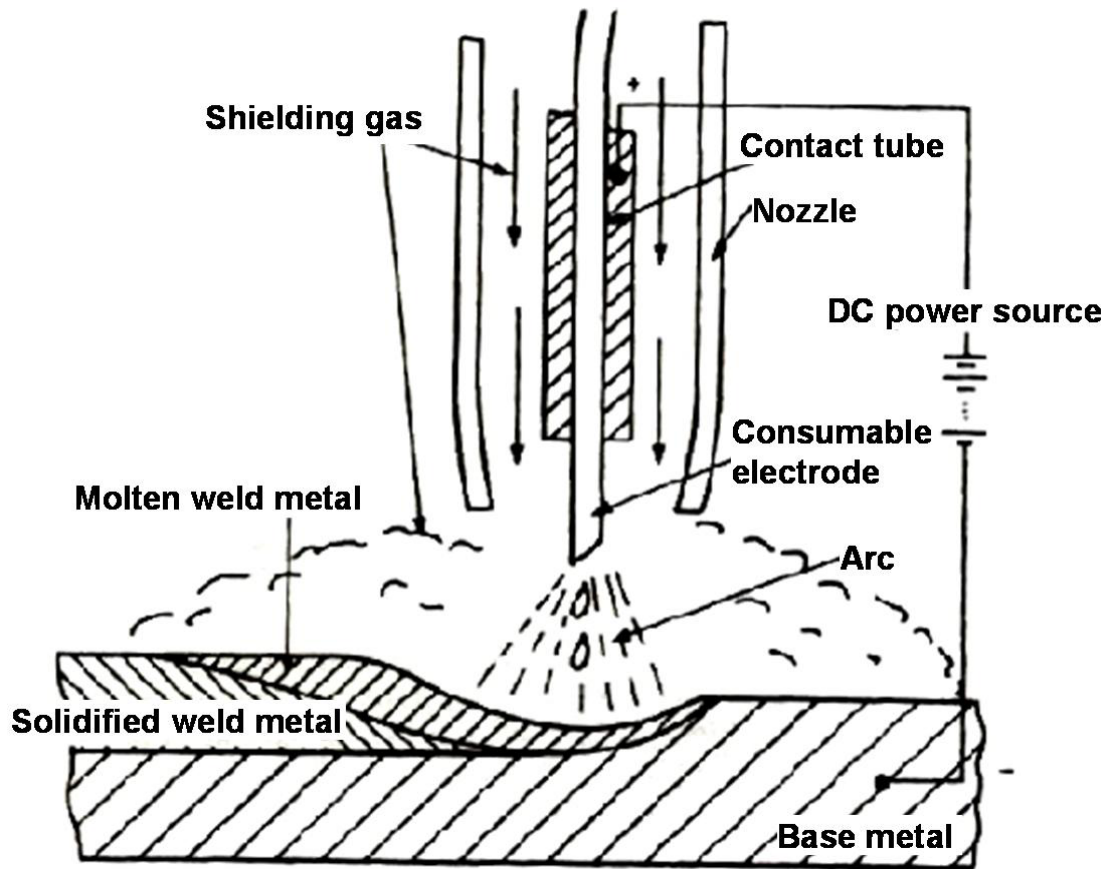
Schematic of gas-metal-arc welding process [7].
